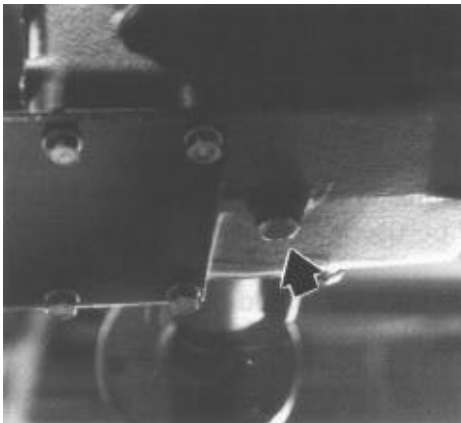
transmission, Rear Axle Centre Housing and Rear Axle Oil Drain Plug
